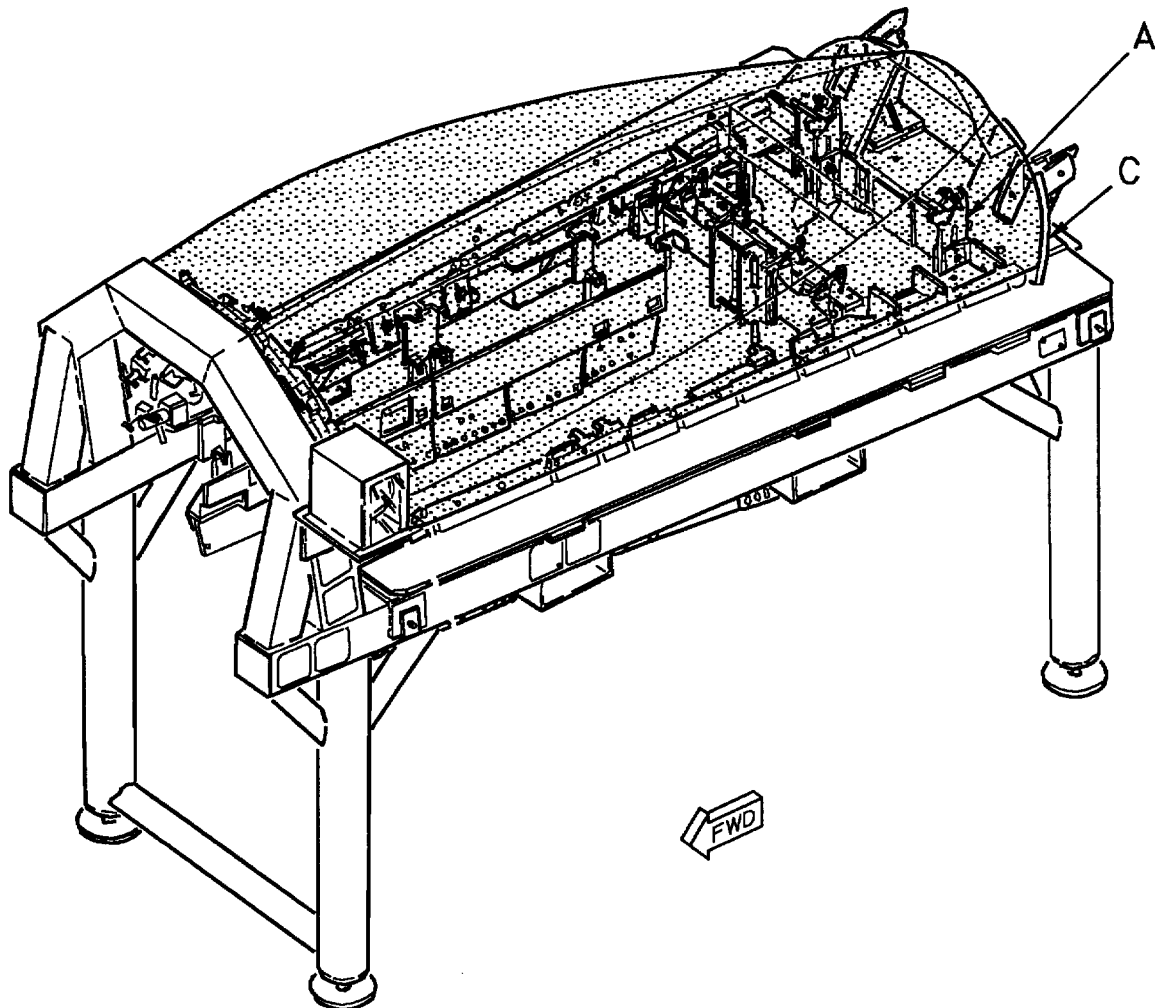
Inspection or Replacement - Aft Beam (Sheet 1)
